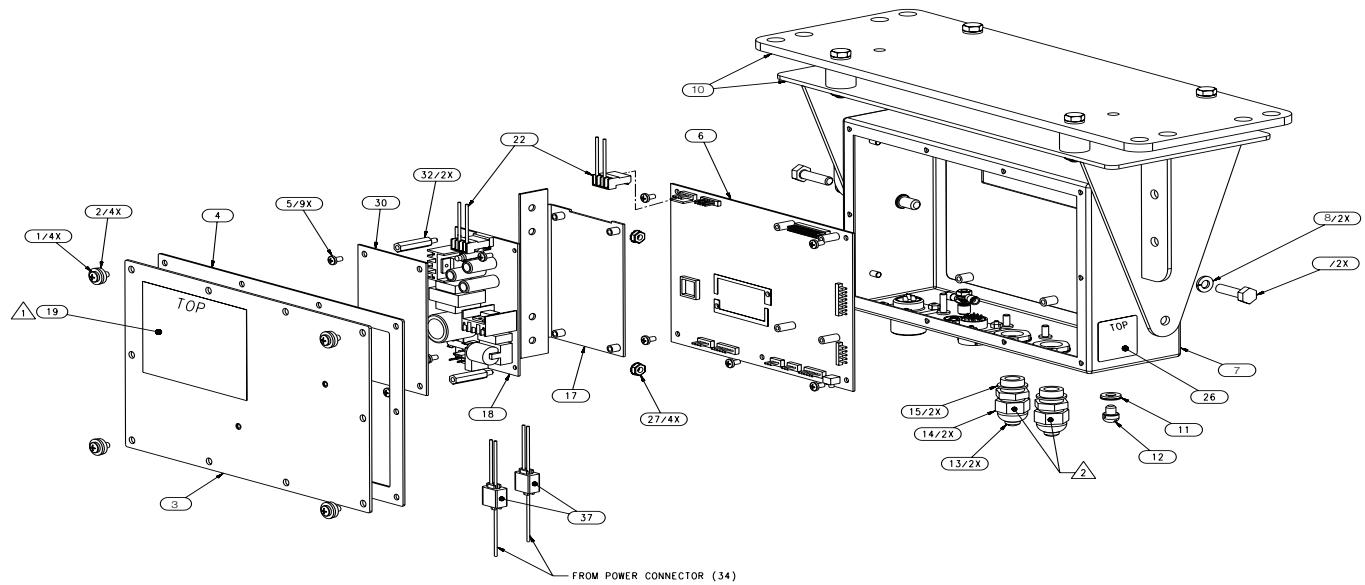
420 Enclosure, Backplate and CPU Board
